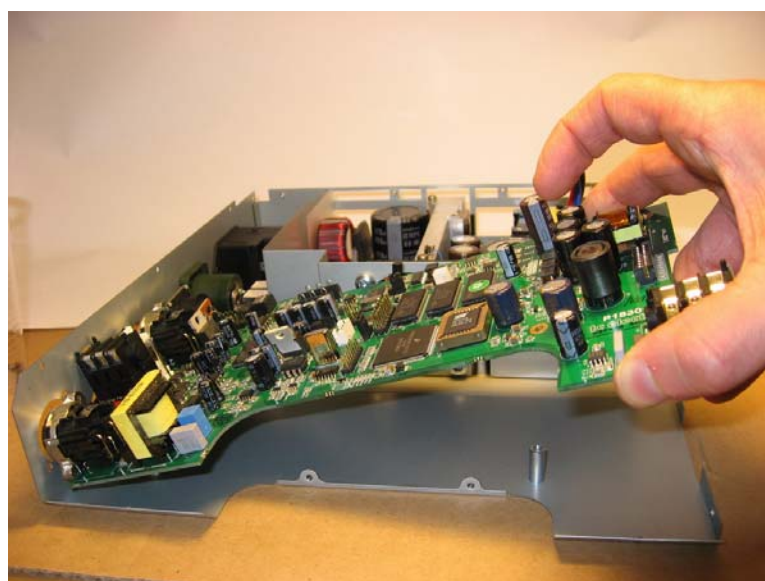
Mount the main board in the inner box. Be sure to put it in, in an angel so the surface mounted components on the backside of the PCB are not damaged.
